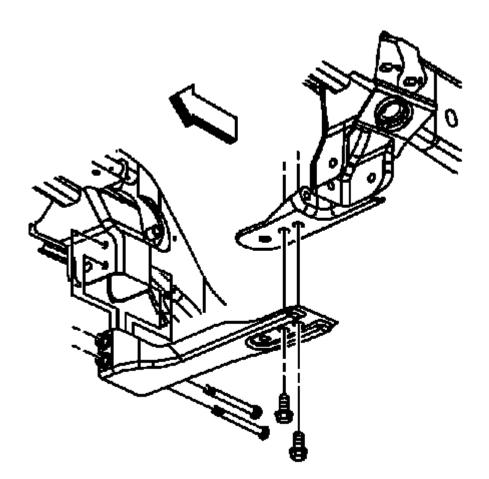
View Of Crossmember Bolts & Bar (4WD Only) Courtesy of GENERAL MOTORS CORP.
